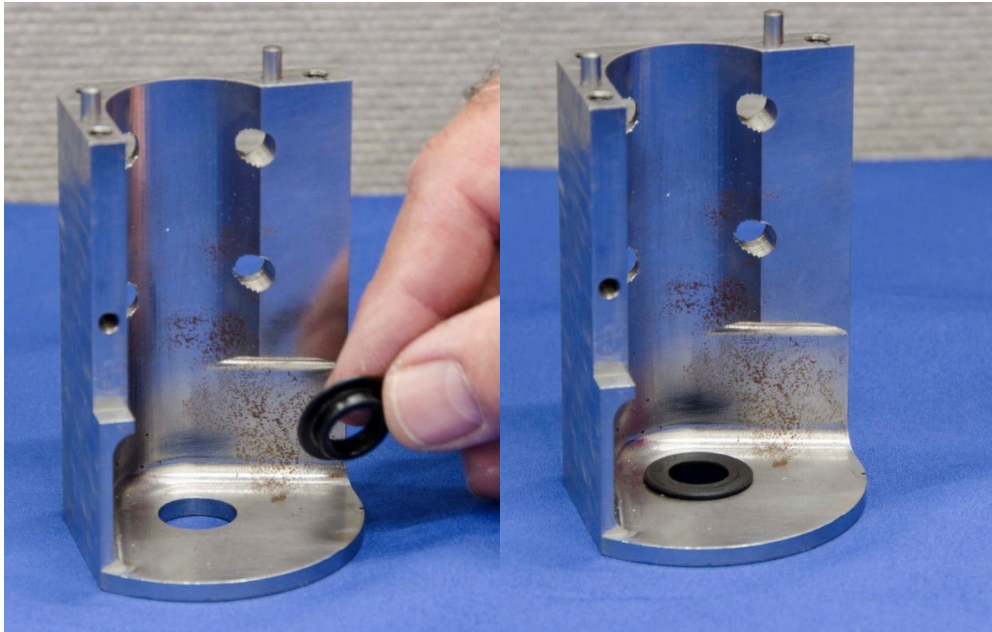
Shoulder support assembly with shoulder pivot shaft for the Option “A” shoulder
